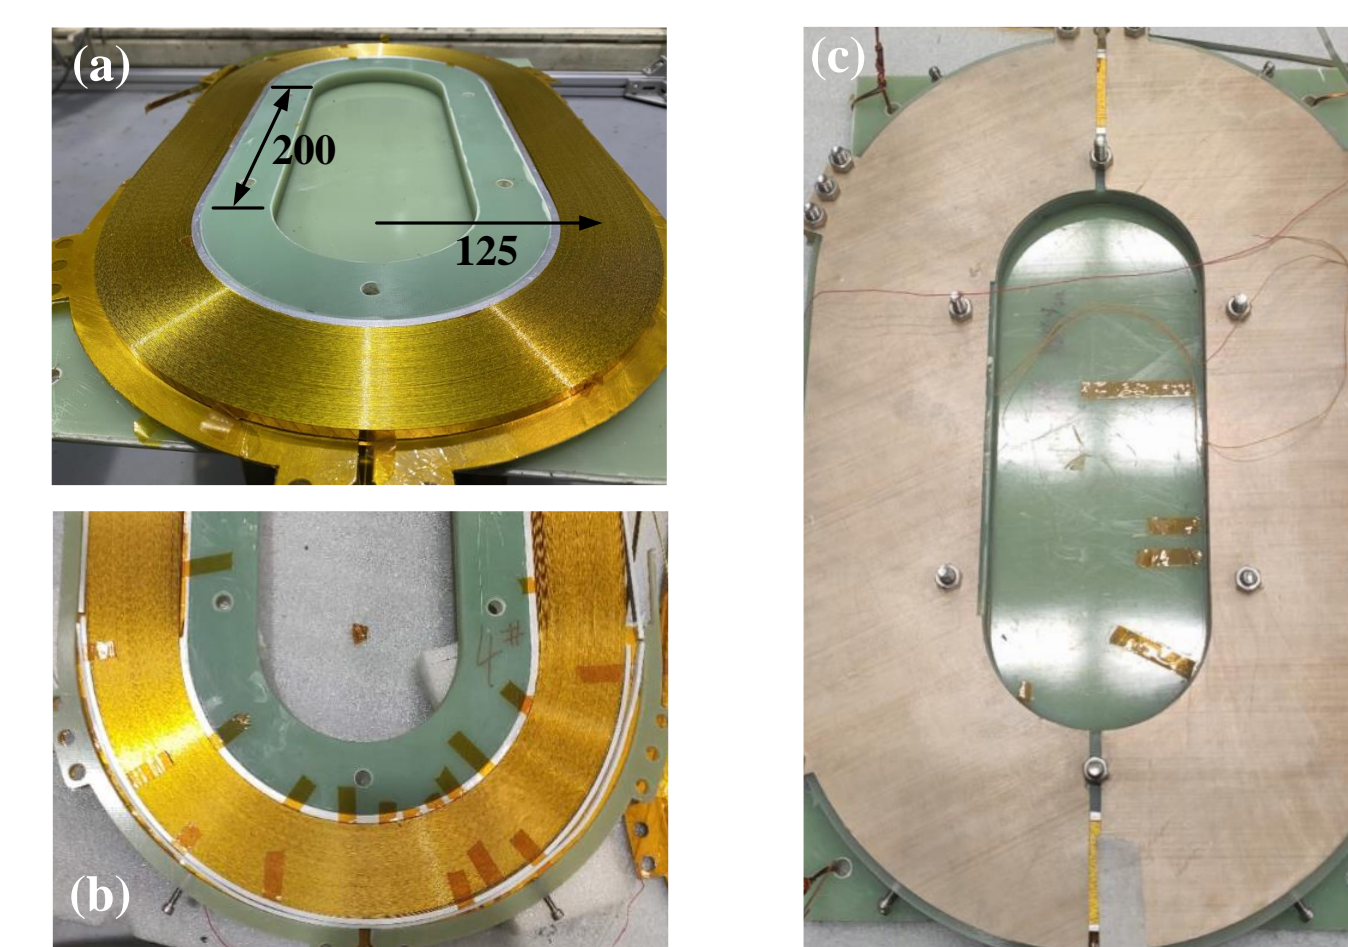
Manufacture of the racetrack HTS DP coil, (a) the winding of DP coil, (b) the coil fastening, and (c) one fabricated DP coil.
